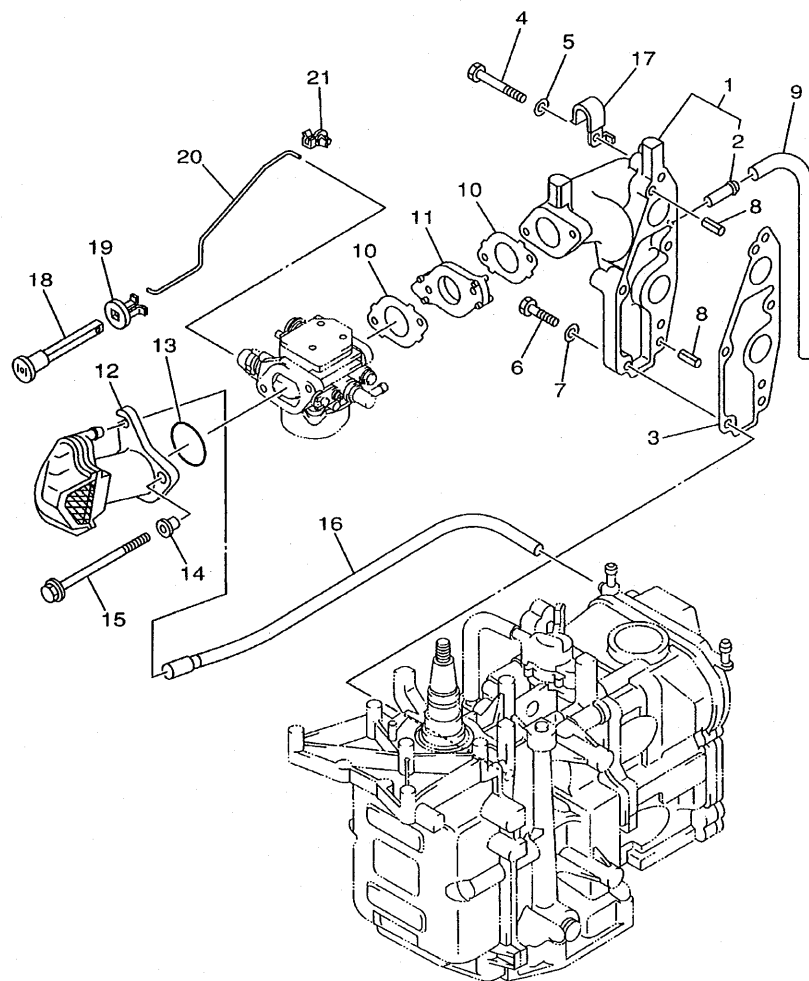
CYLINDER. CRANKCASE 2 CYLINDRE. CARTER 2
